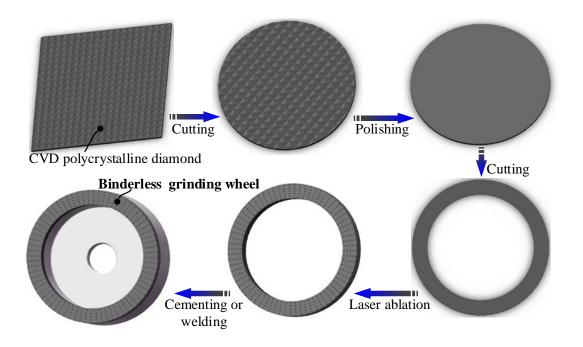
Manufacturing processes of binderless diamond grinding wheel
